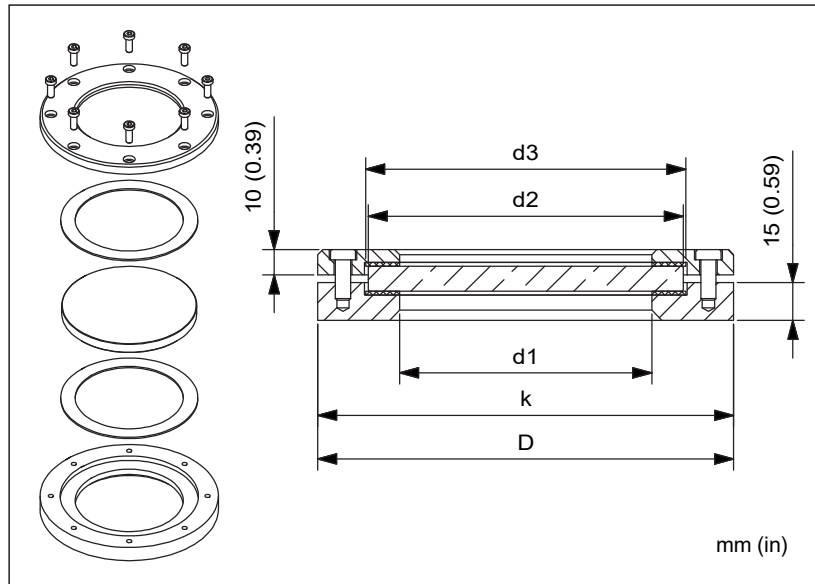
Dimensions of sight glass fitting for welding on/in for unpressurized processes
